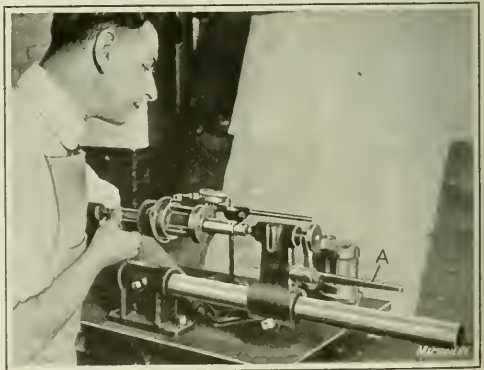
Inspecting the Retainer Casting for Concentricity of Diameters
